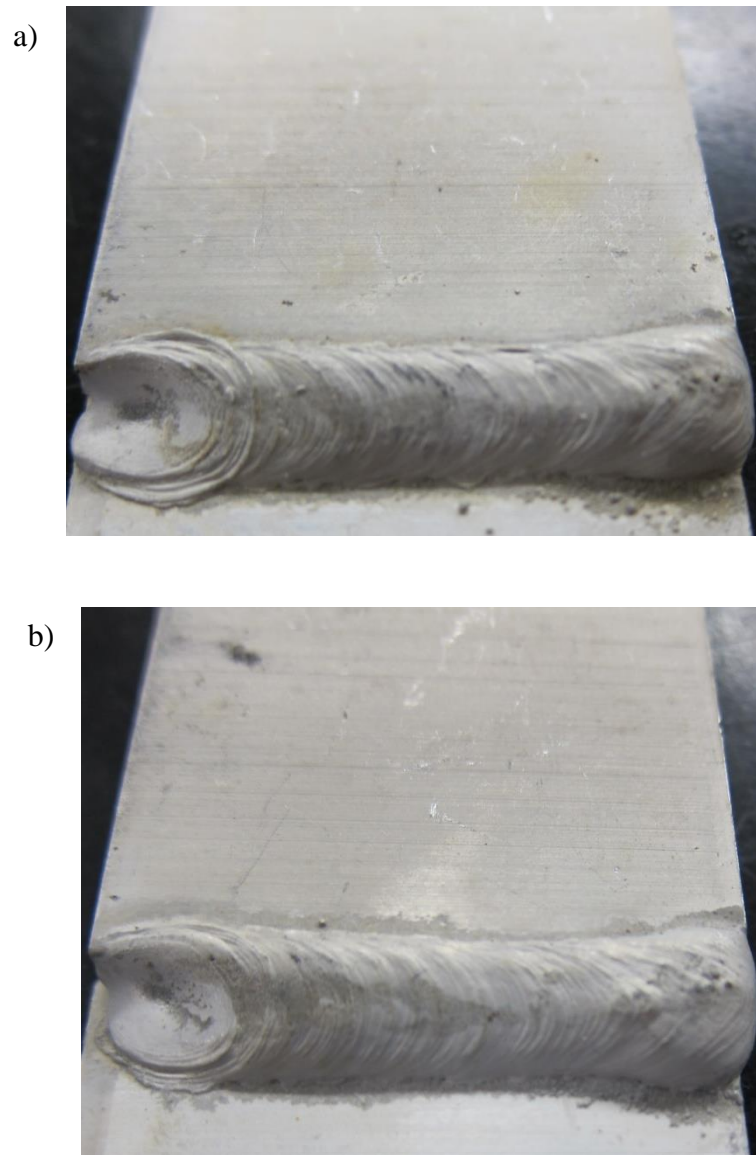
Close-up images of lap-joint welded configuration G (ER5356/AA7003/≡) in the (a) as-welded T6 condition and (b) as-welded T6+PB condition post exposure to GMW-14872.
